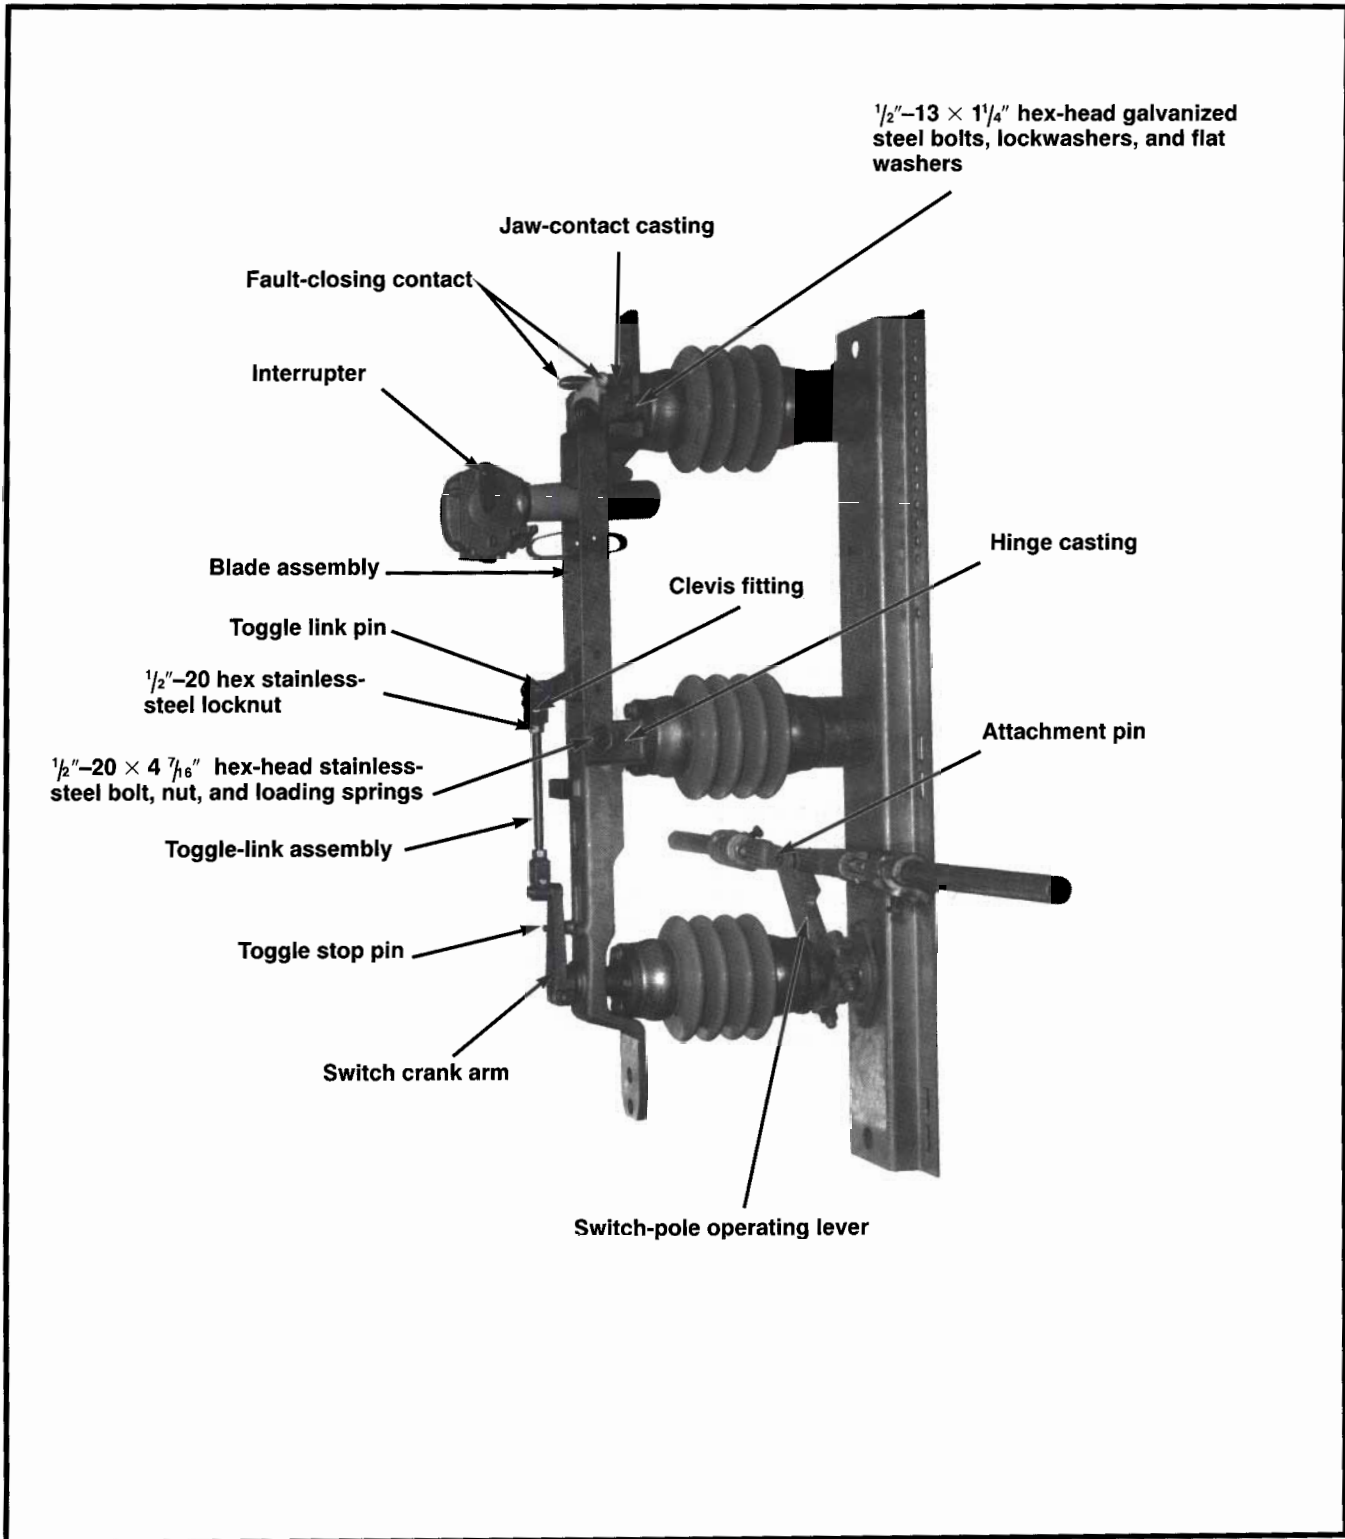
One switch pole of Three-Pole Vertical-Break Style Alduti-Rupter Switch. Typical for switches rated 7.2 kv through 25 kv, 600 amperes and 1200 amperes (600-ampere rating shown).
